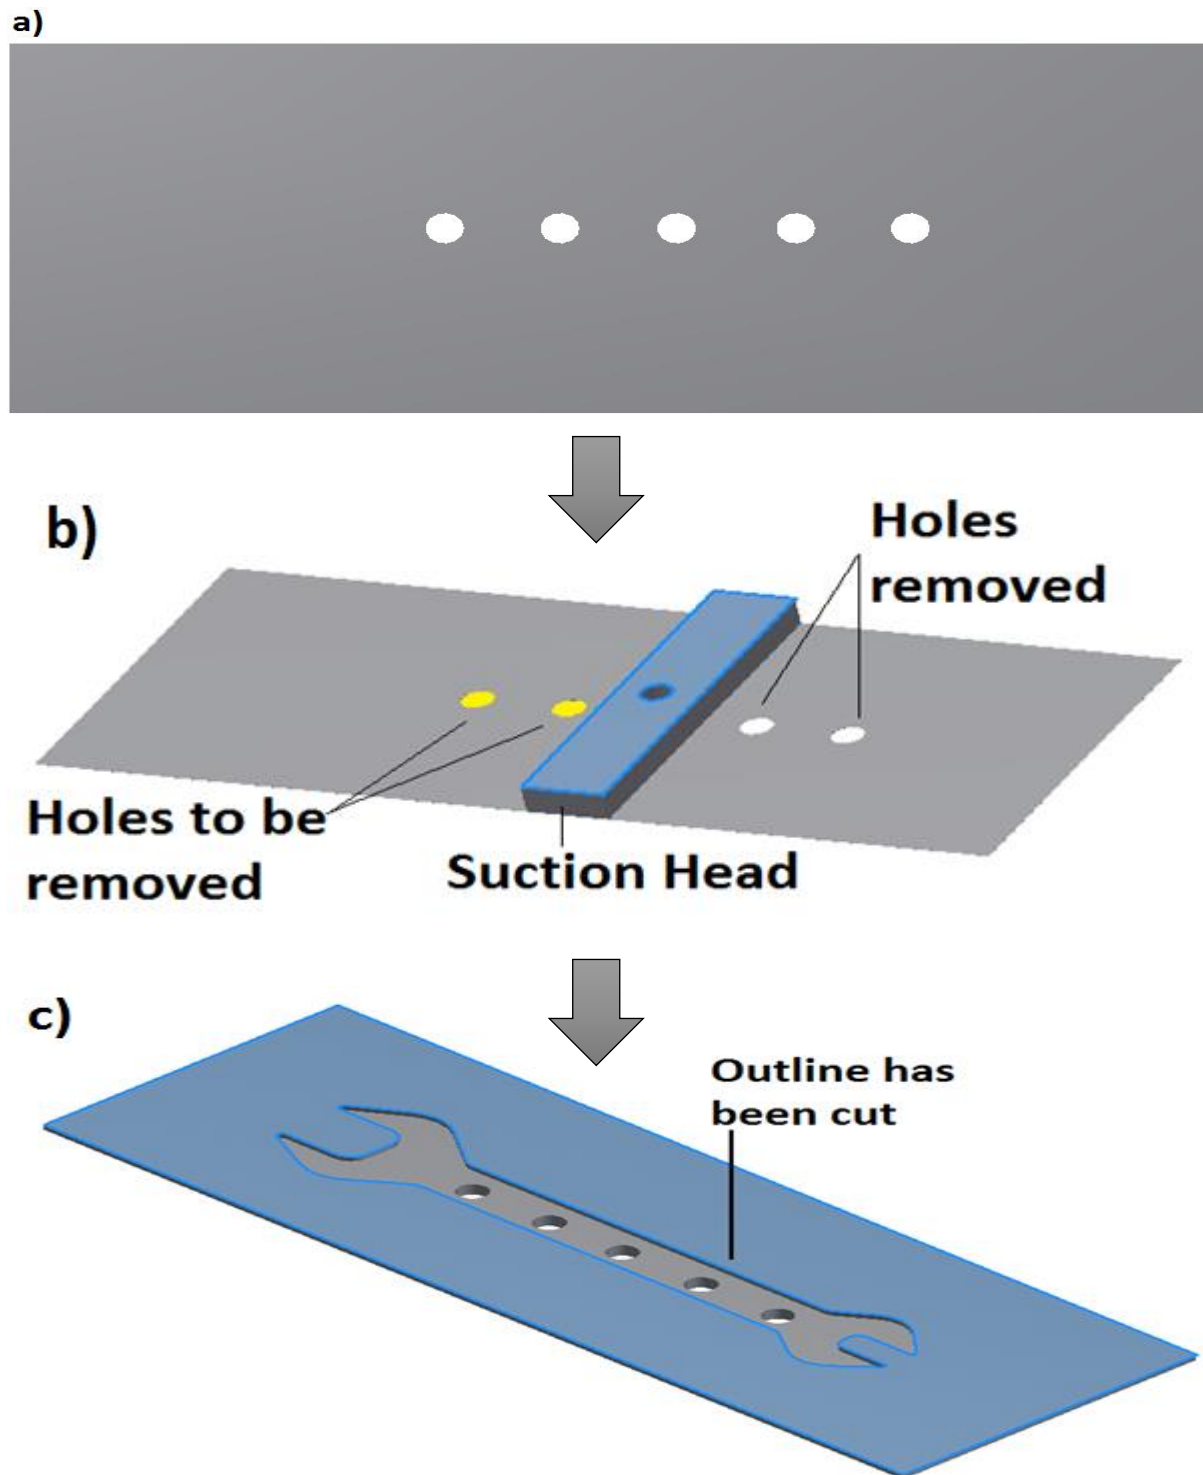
Mode 2 of CMFM: a) Cutting of holes; b) Removal of loose metal by the suction head; c) Outline of the spanner is cut
